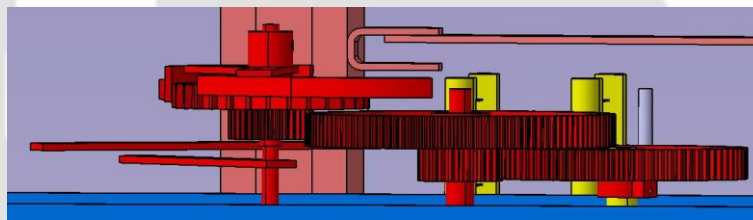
5-Wheel gear mechanism top view of Shanti loom
